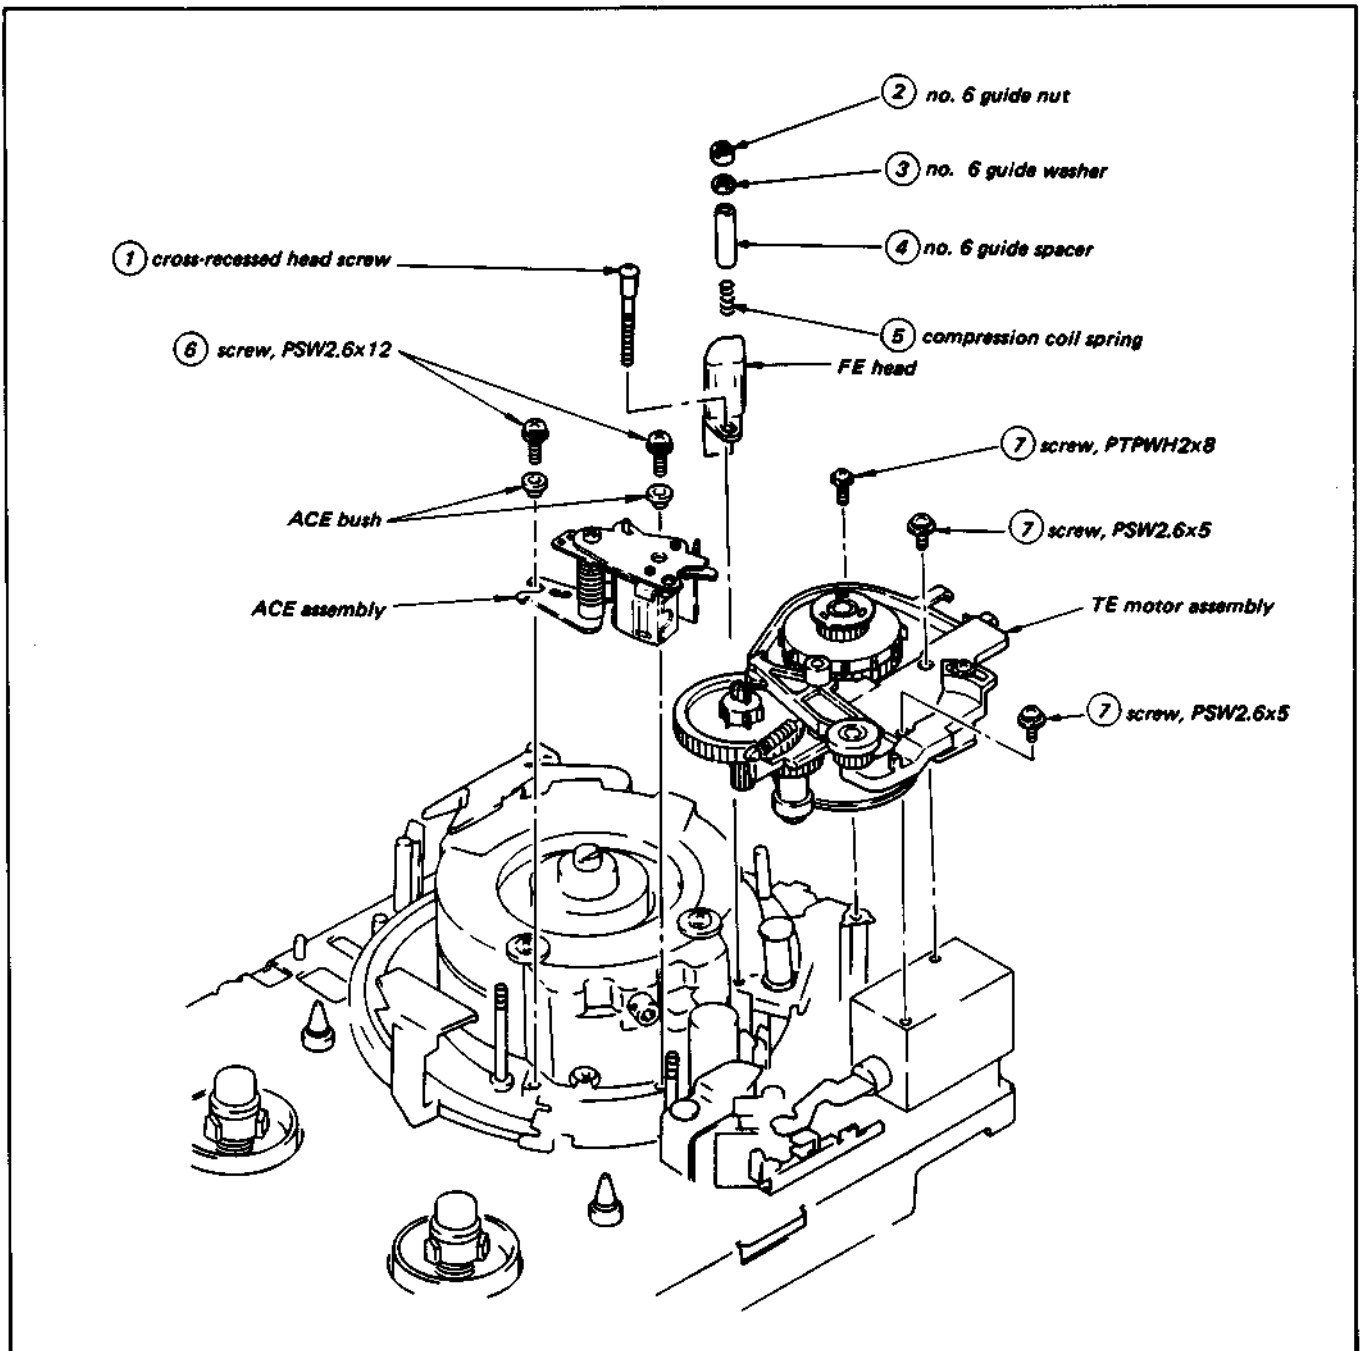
Removal of the ACE assembly, FE head and TE motor assembly.
